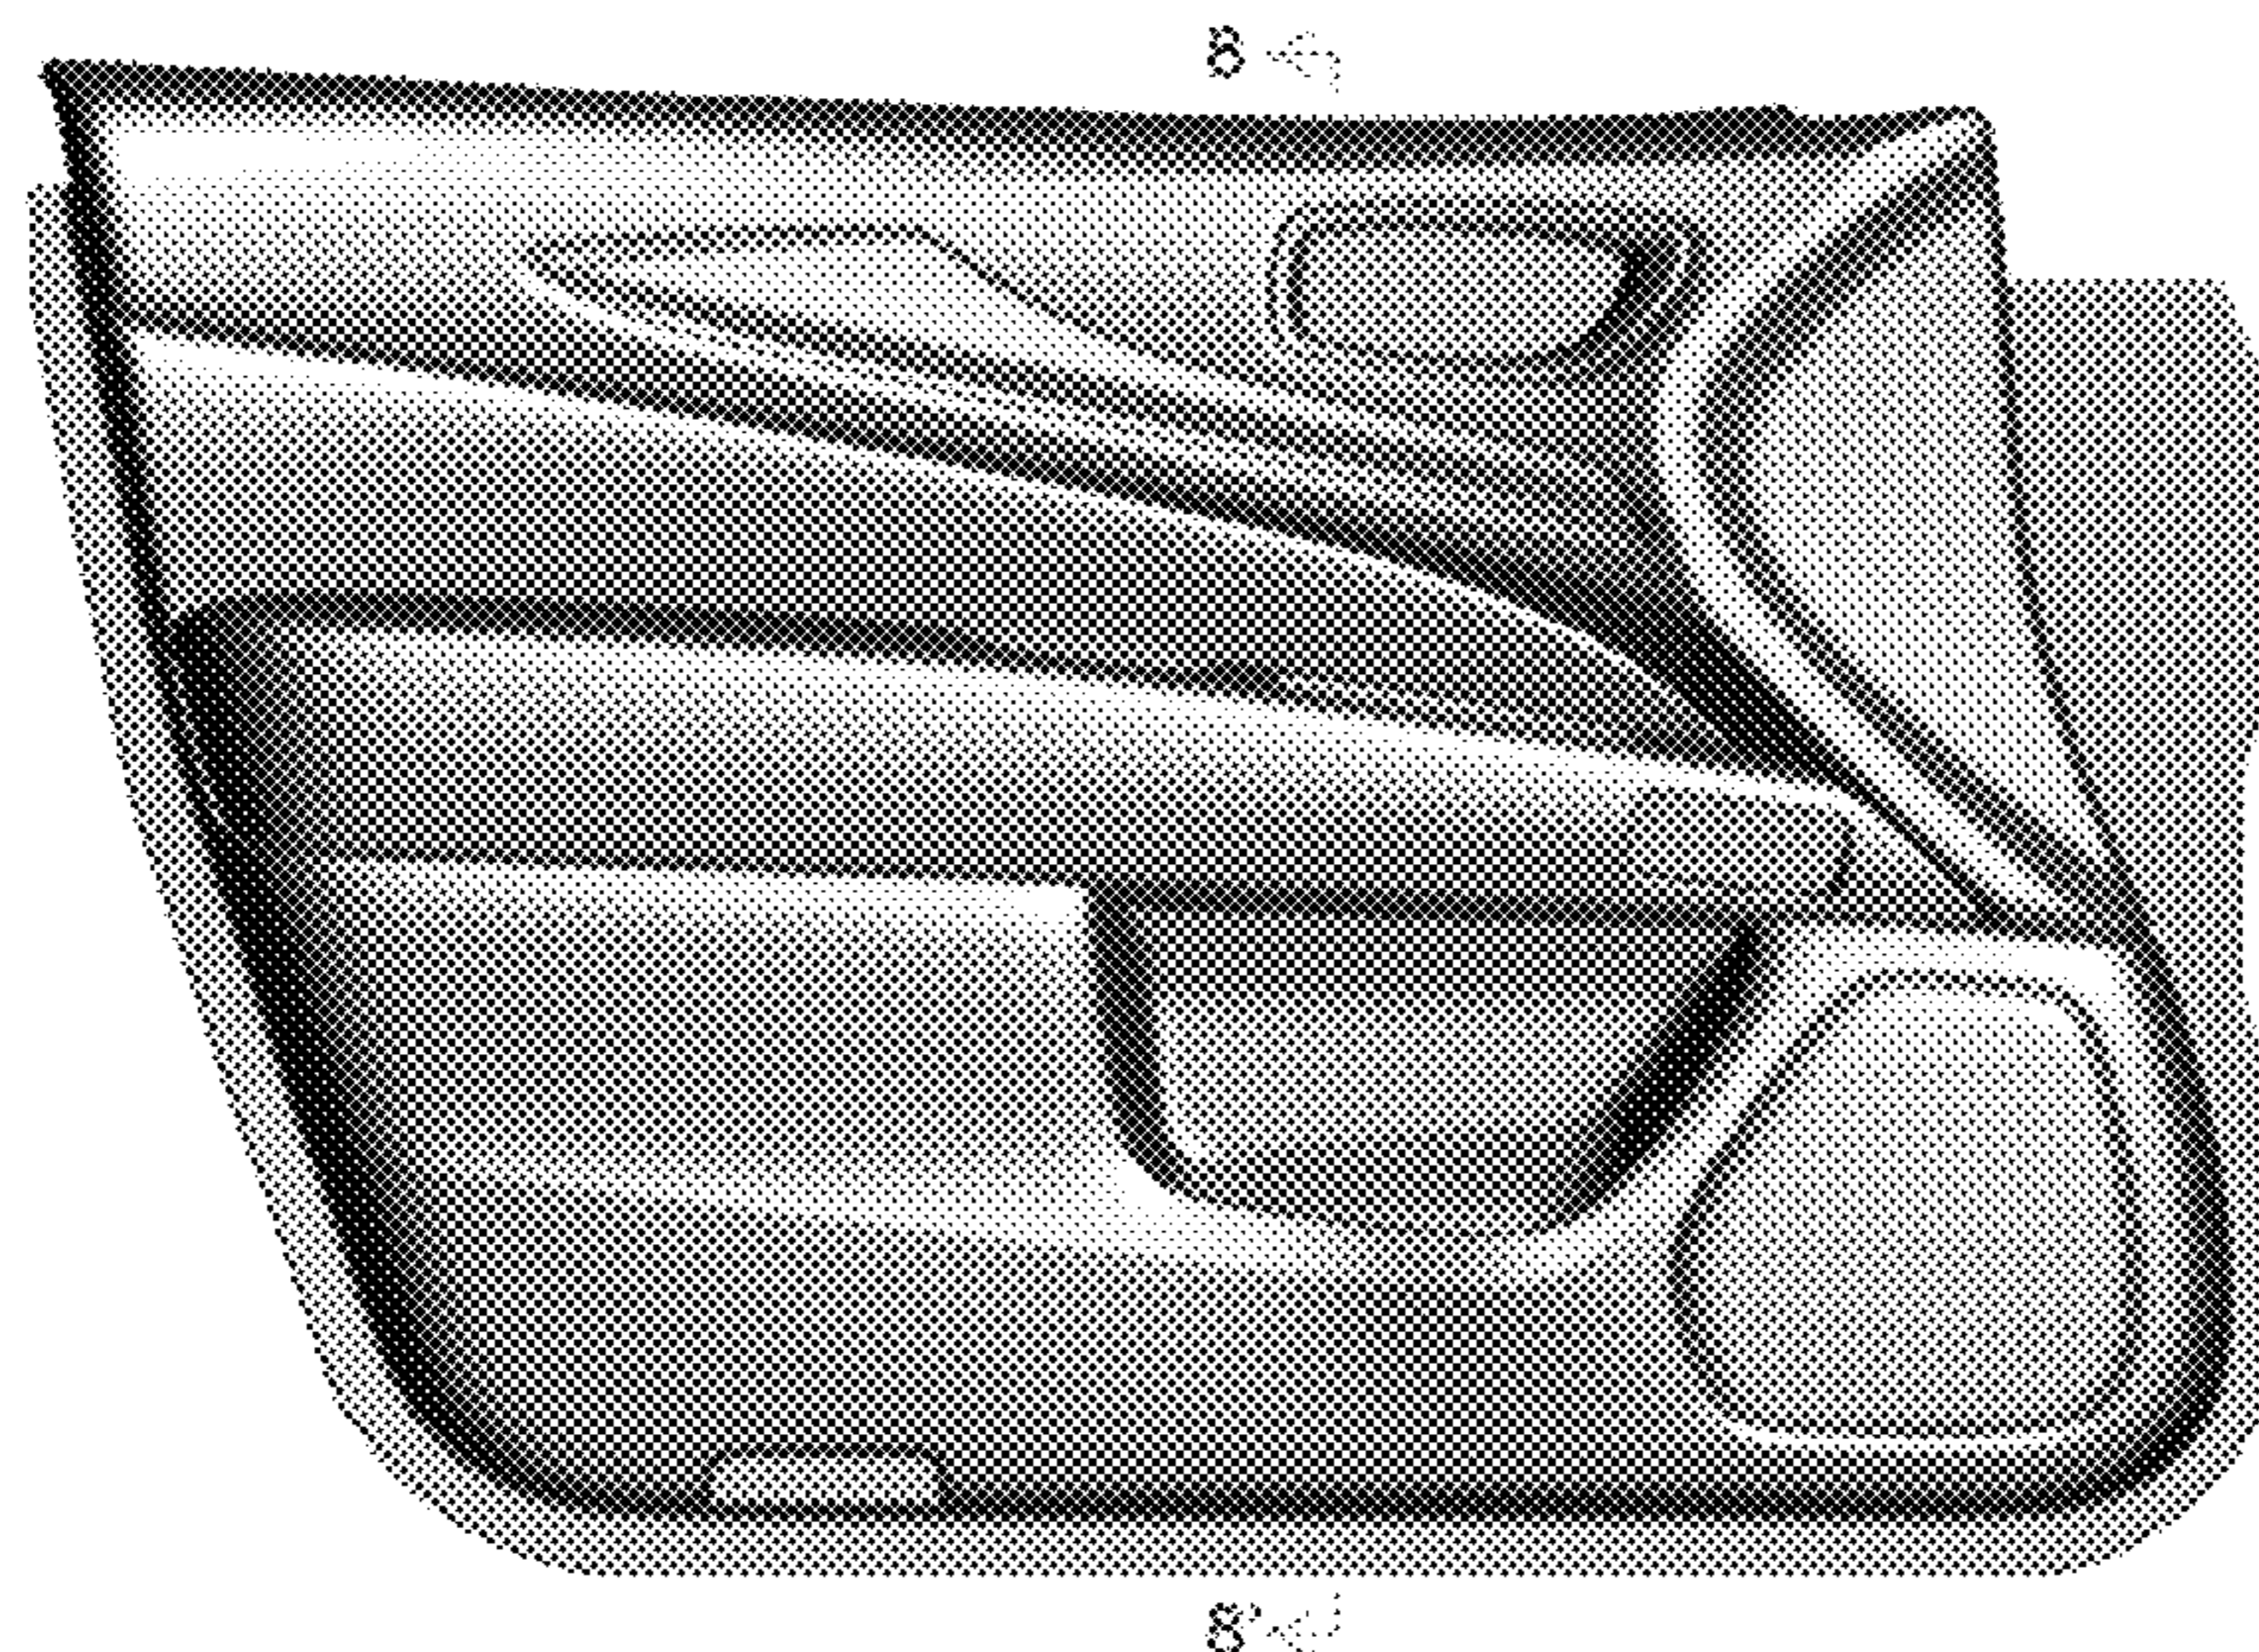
is a front, right and top side perspective view of the front door trim panel in accordance with our new design of FIGS. 1 to 5; and,
